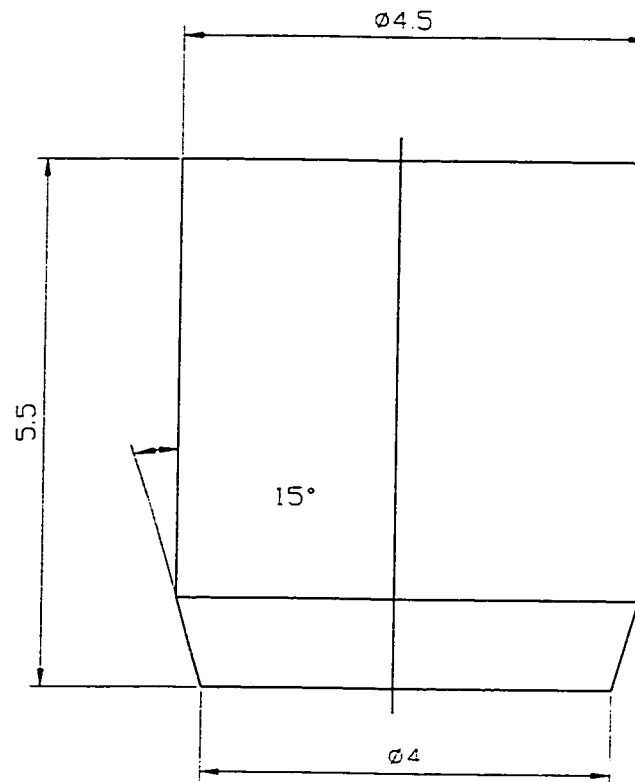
Typical 5.5mm Brånemark Abutment
